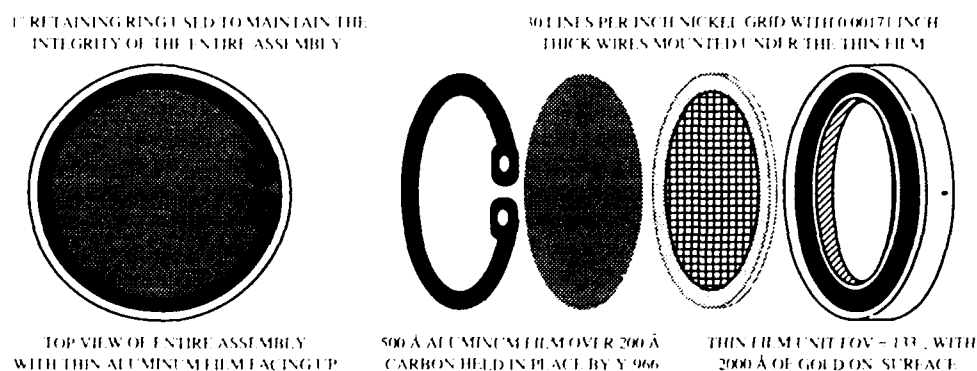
Exploded View of the BUSSL Impact Unit Flown on STS missions.
